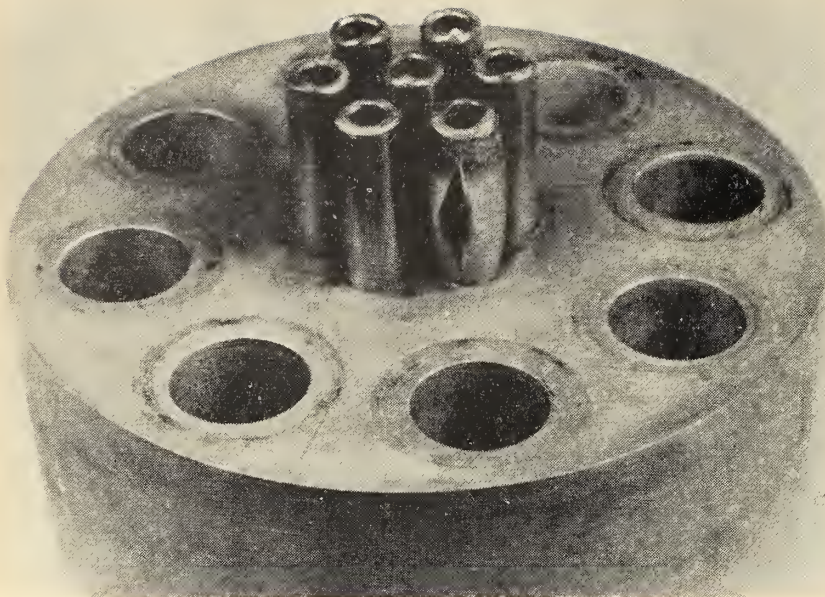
Cupro-nickel to mild-steel welds. Failed pressure test sample, showing burst tube.
